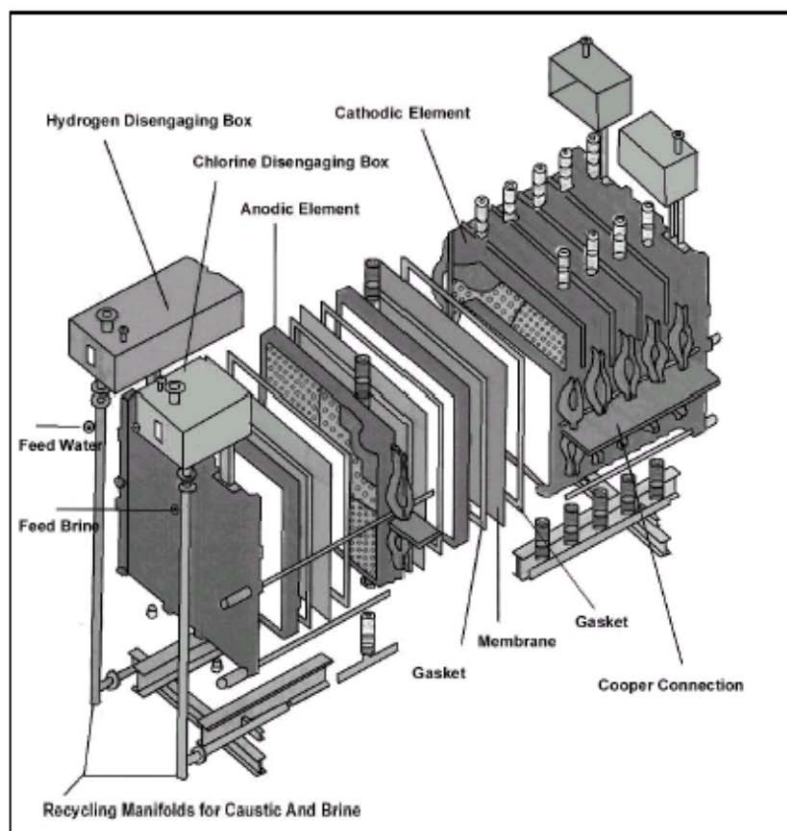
Exploded view of a monopolar membrane electrolyser
